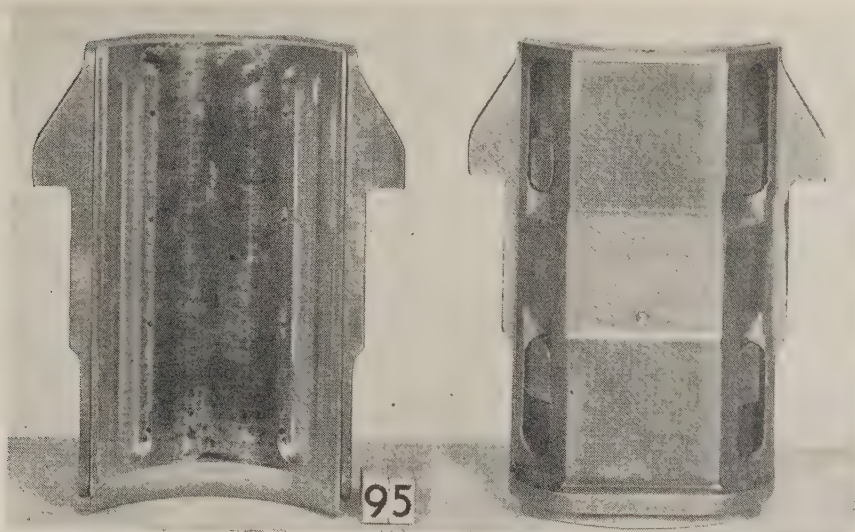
RAILWAY SERVICE & SUPPLY CORPORATION "V" BEARING 95
